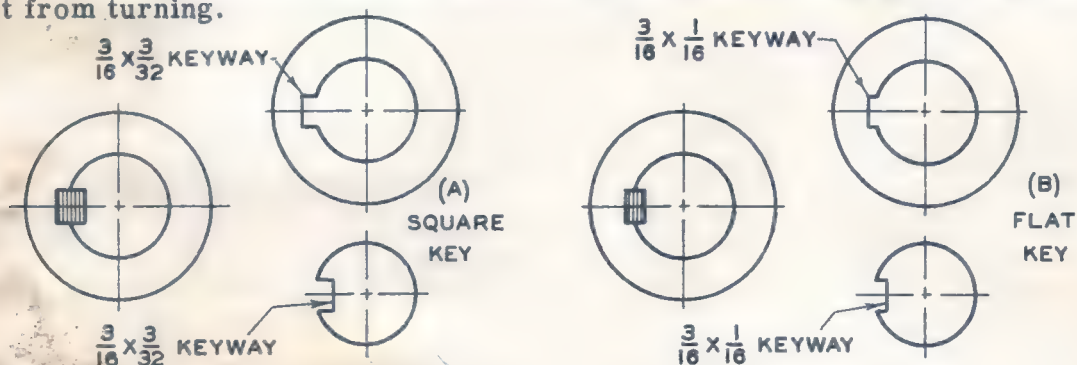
DIMENSIONING SQUARE AND FLAT KEYWAYS
